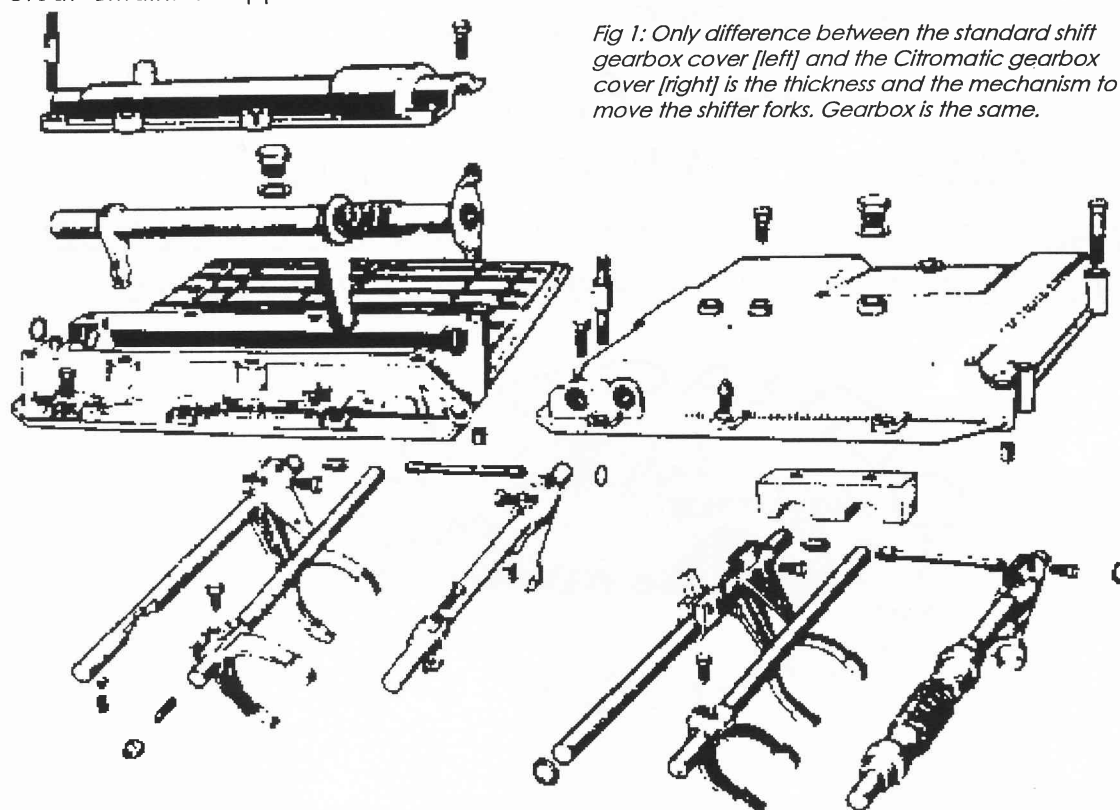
Only difference between the standard shift gearbox cover [left] and the Citromatic gearbox cover [right] is the thickness and the mechanism to move the shifter forks. Gearbox is the same.
